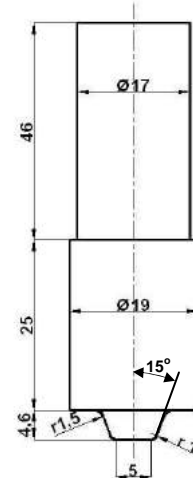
Tool for friction stir welding aluminium alloy EN AW 7049A in condition T 652
